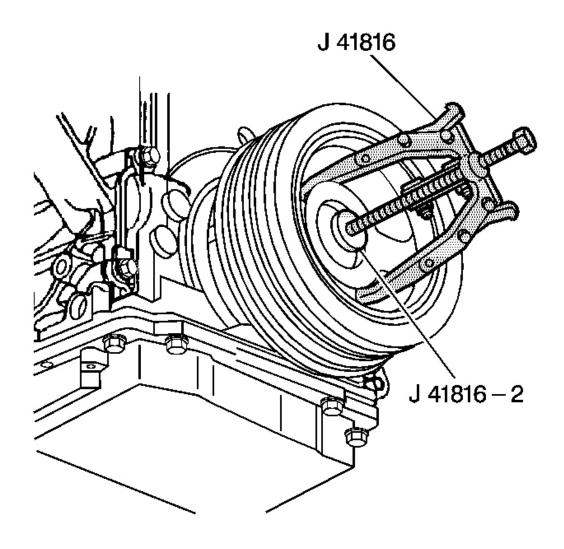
Removing The Crankshaft Balancer Courtesy of GENERAL MOTORS CORP.
